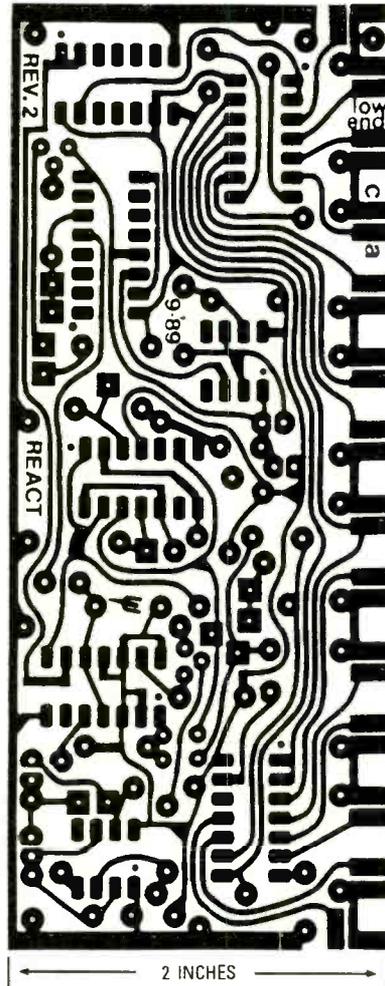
The Reaction Timer was assembled on a printed-circuit board, a template for which is shown here.
